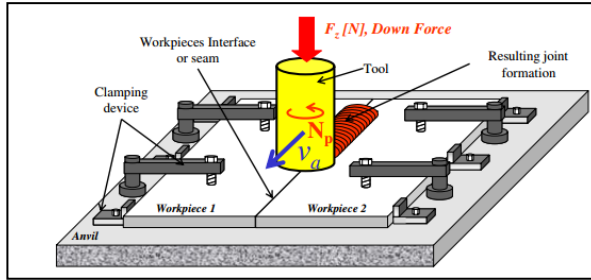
Schematic drawing of friction stir welding of two plates
